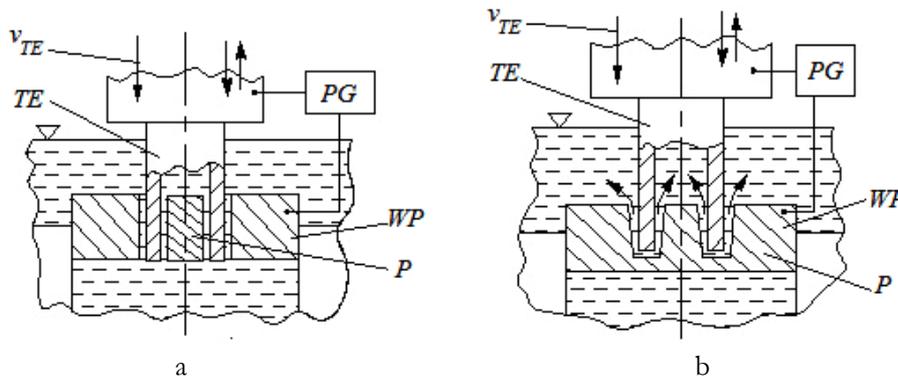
Detaching a part from workpiece by electrical discharge machining with a tubular tool electrode:
